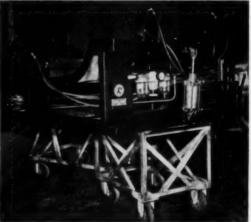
Controls and air tubing for operation of welding fixture
